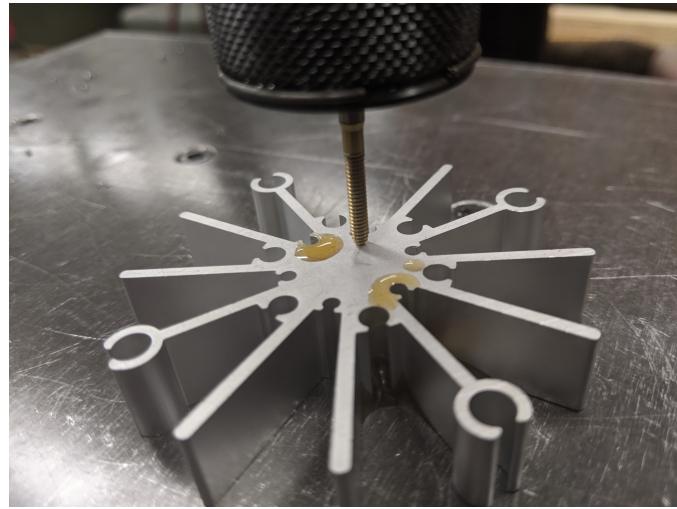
Two of the innermost holes on the extruded heatsink must be 4-40 tapped.
